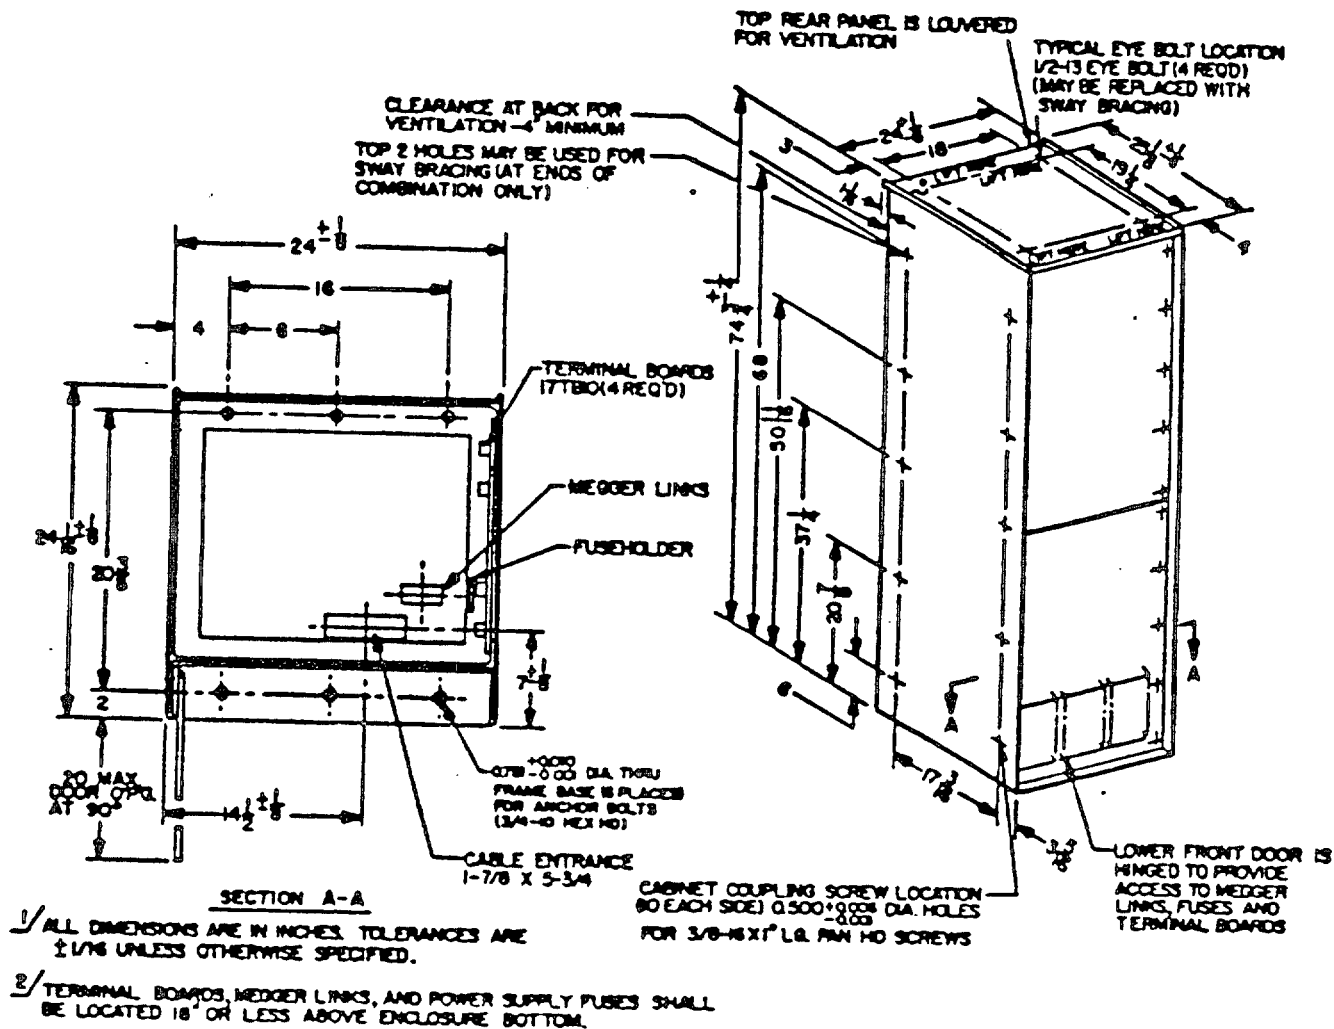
3 and 5 kW power supply, outline drawing.
